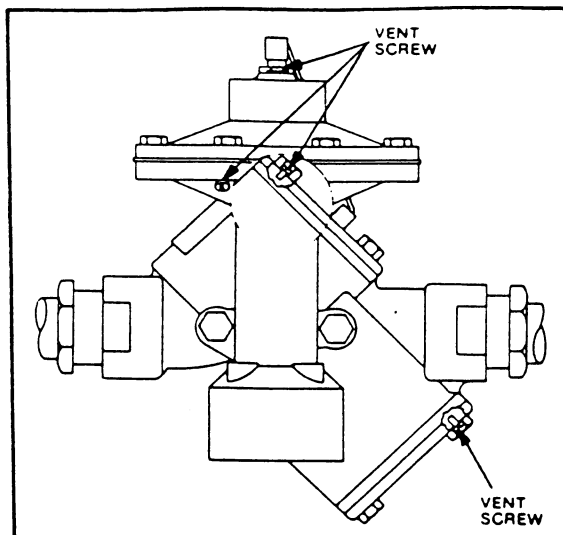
VENTING CHECK AND RELIEF VALVES
